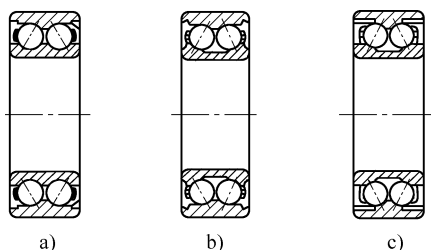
12 The double row angular contact ball bearings of both sides with shields and with seals
